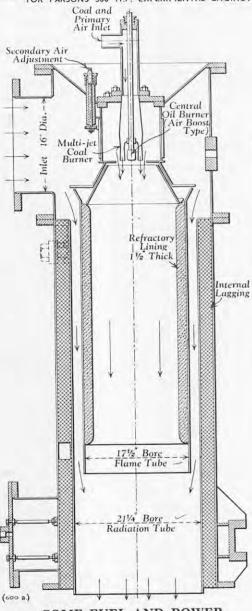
COAL-BURNING COMBUSTION CHAMBER FOR PARSONS 500 H.P. EXPERIMENTAL ENGINE
